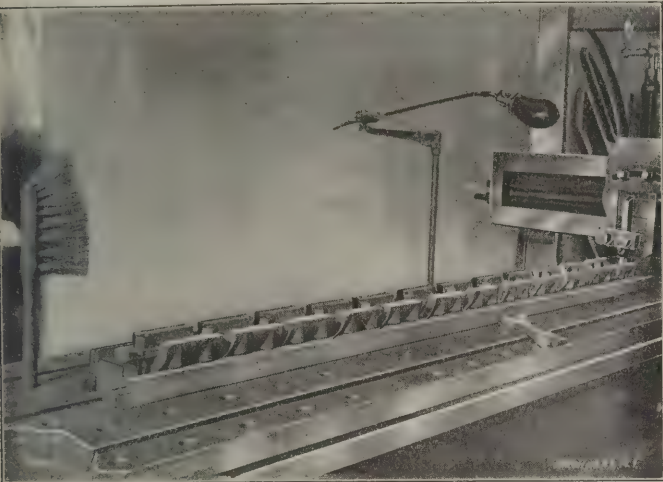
Fixture for Holding Caps for Bearings while Planing.
